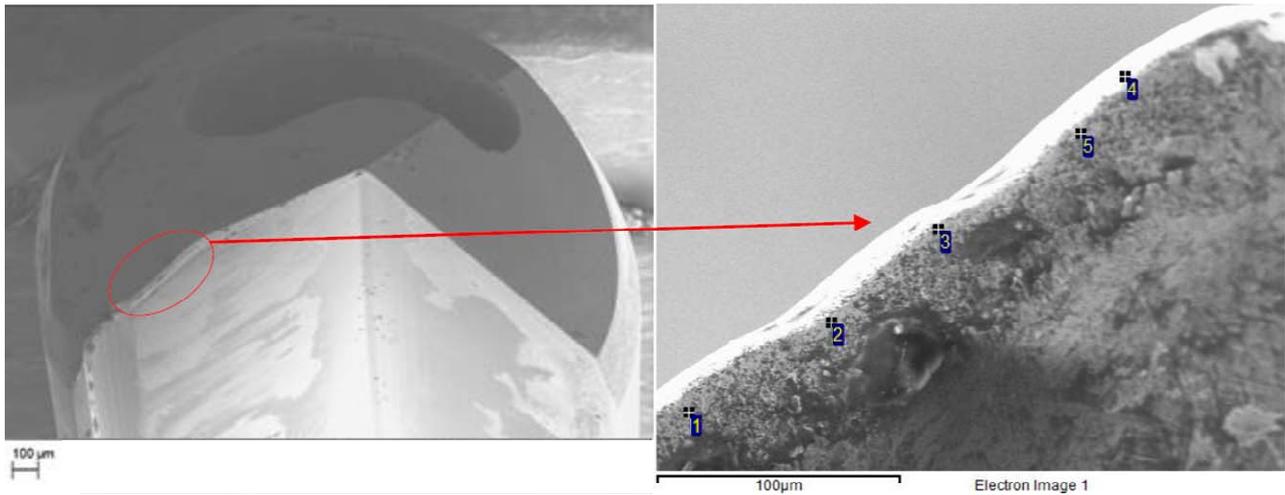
Manual honed tool after drilling 50 holes (a), detailed view (b).
